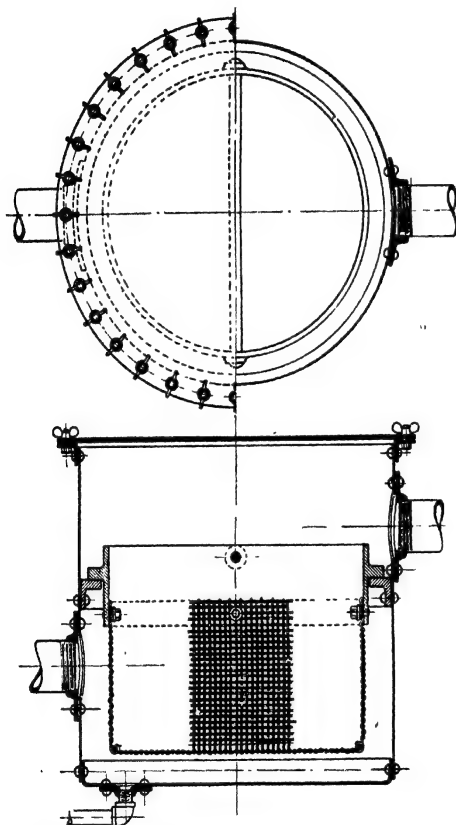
AMSLER SAWDUST SCRUBBER FILTER AND DRYER.
